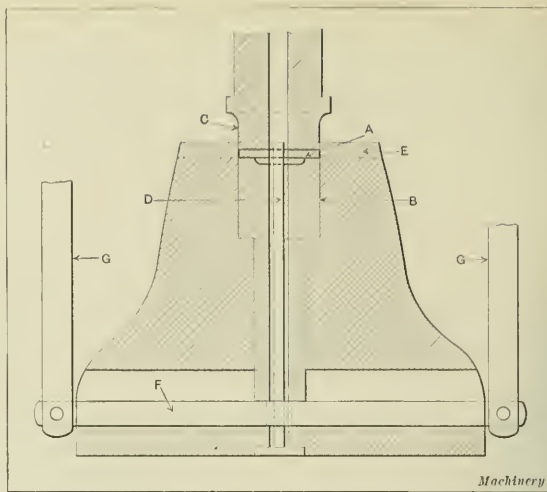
Punch and Die used for making Die-pressed Clutch Casting shown at A
